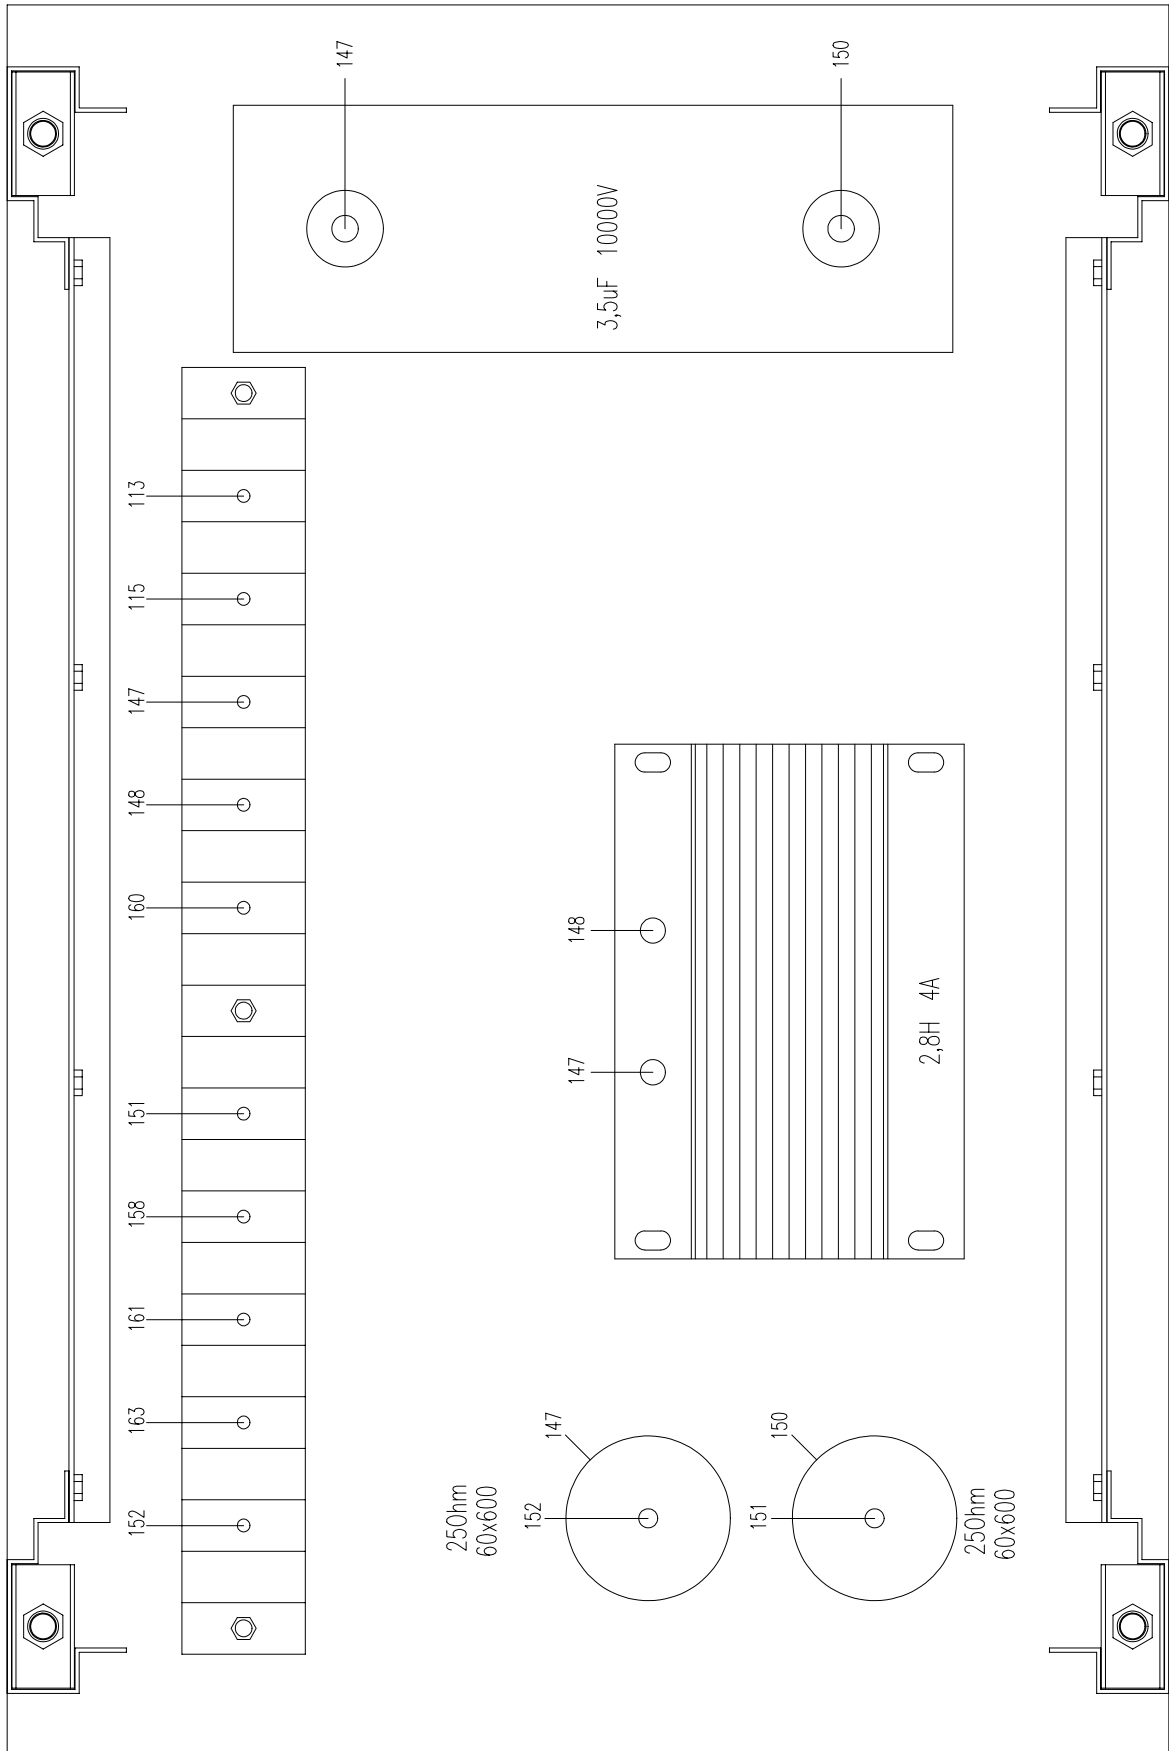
SECTIONAL VIEW OF THE POWER SUPPLY P2
